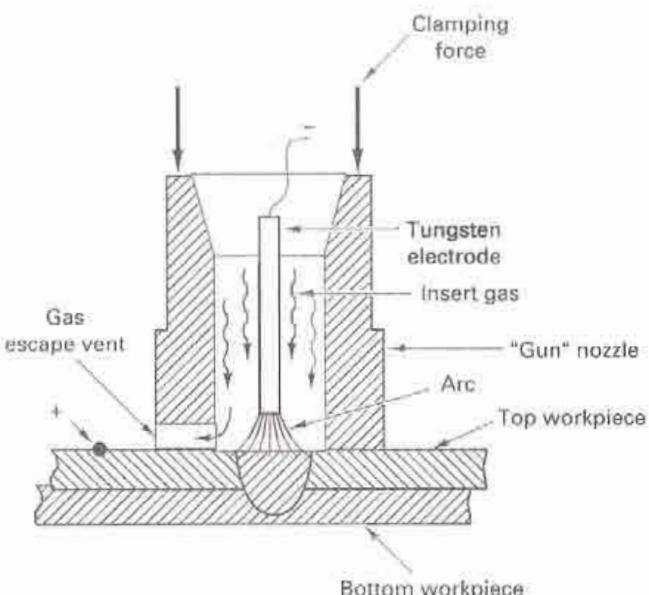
Process schematic of spot welding by the inert-gas-shielded tungsten arc process.
